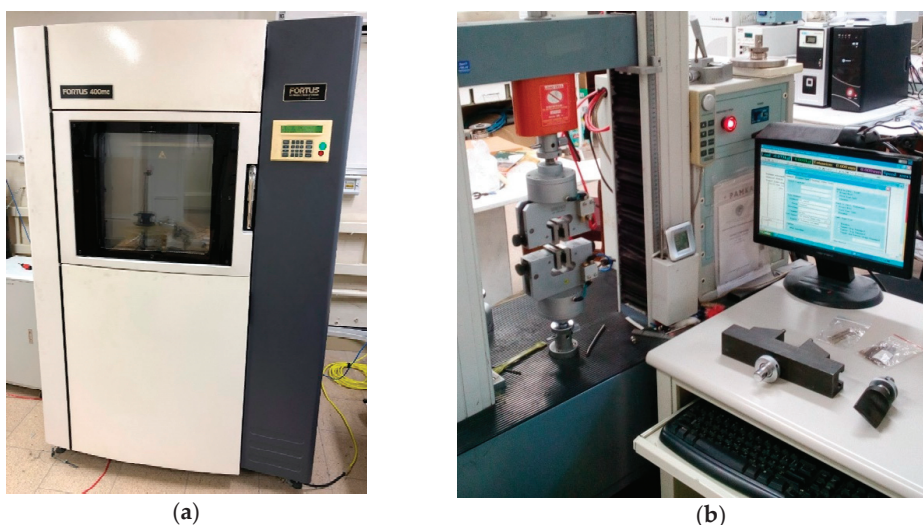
3D printer Fortus 400mc (a) and universal testing machine GT-TCS 2000 (b).
